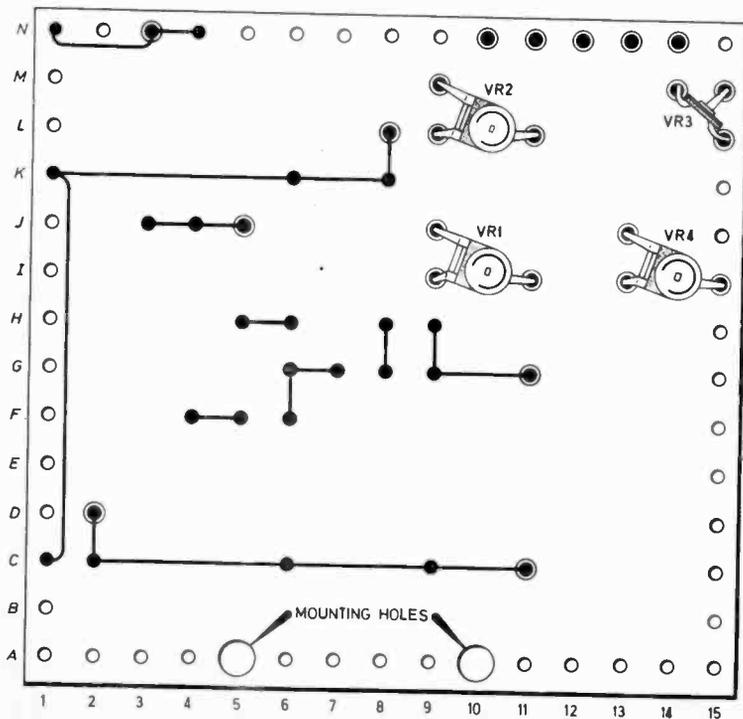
Layout and wiring of the components mounted on the board. The preset potentiometers are mounted on the underside of the board (shown below) so that they can easily be adjusted.
